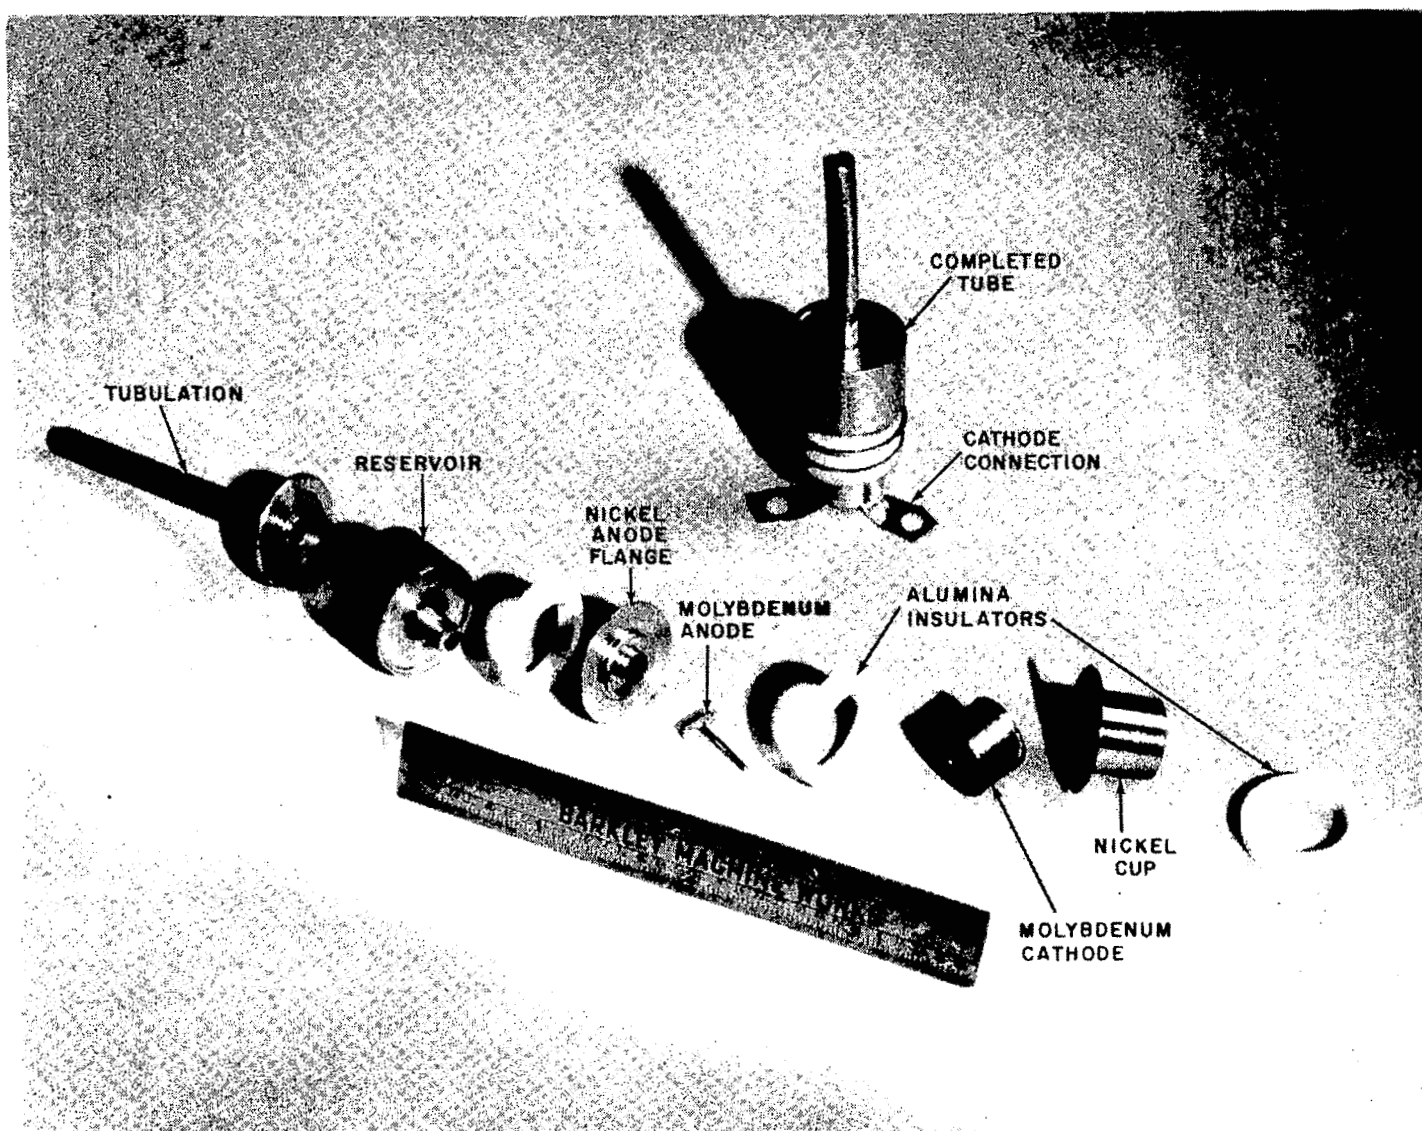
Design III Voltage-Regulator Tube and Component Parts
